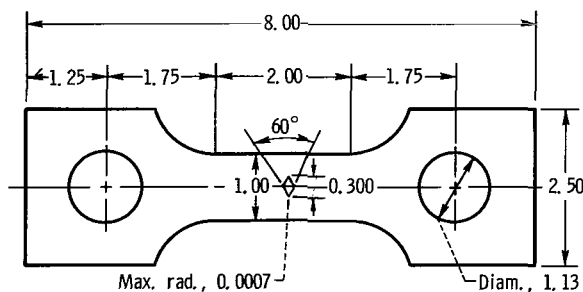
Notched-sheet fatigue specimen. (Dimensions are in inches.)
